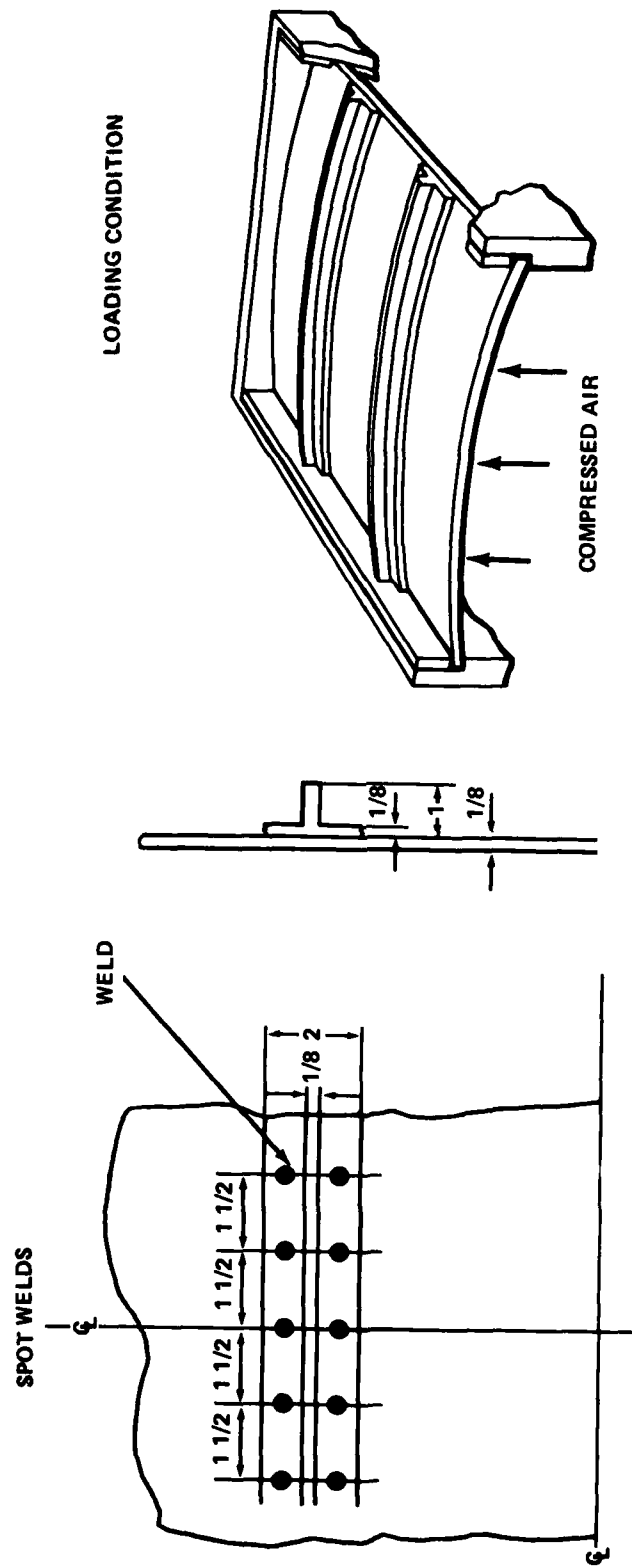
Weldbonded Stiffened Panel, Spot Weld Location
